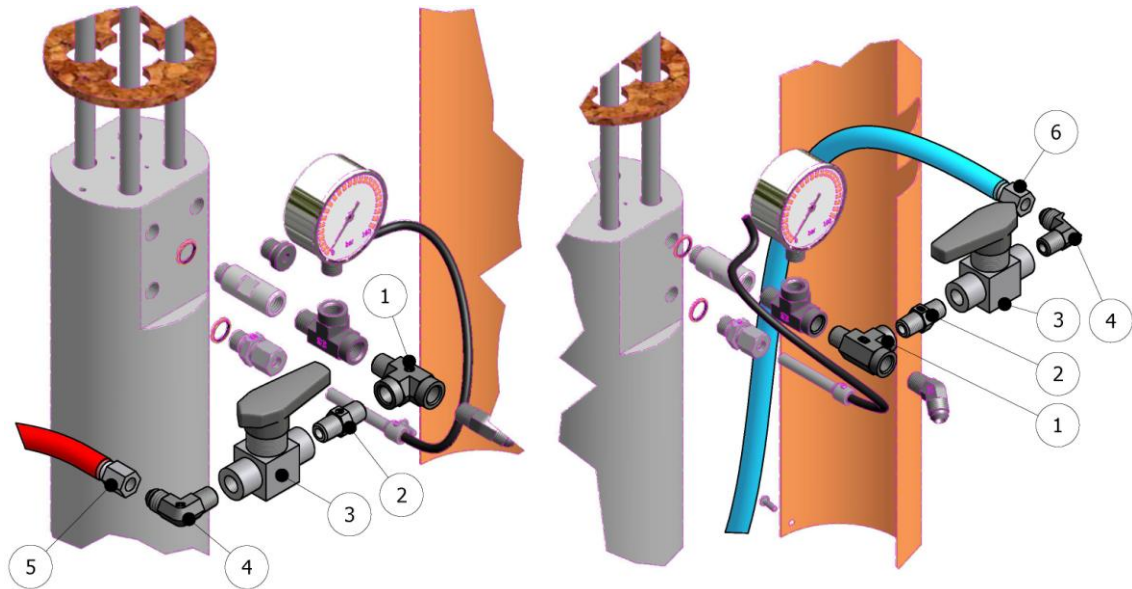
Recirculation Kit P#: KT-00038, Exploded View
